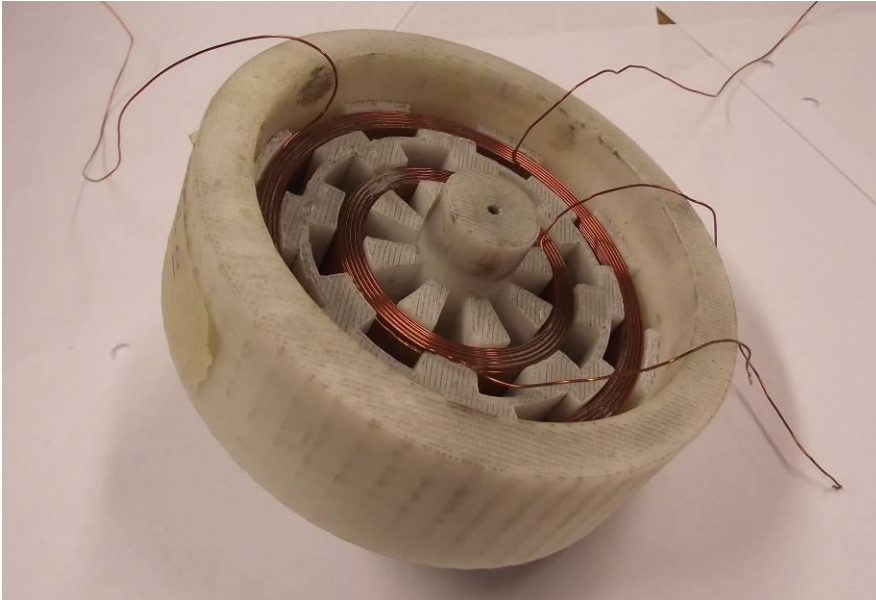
An axial flux machine containing no moving parts inside the stator; this means that the stator house is the mould.
